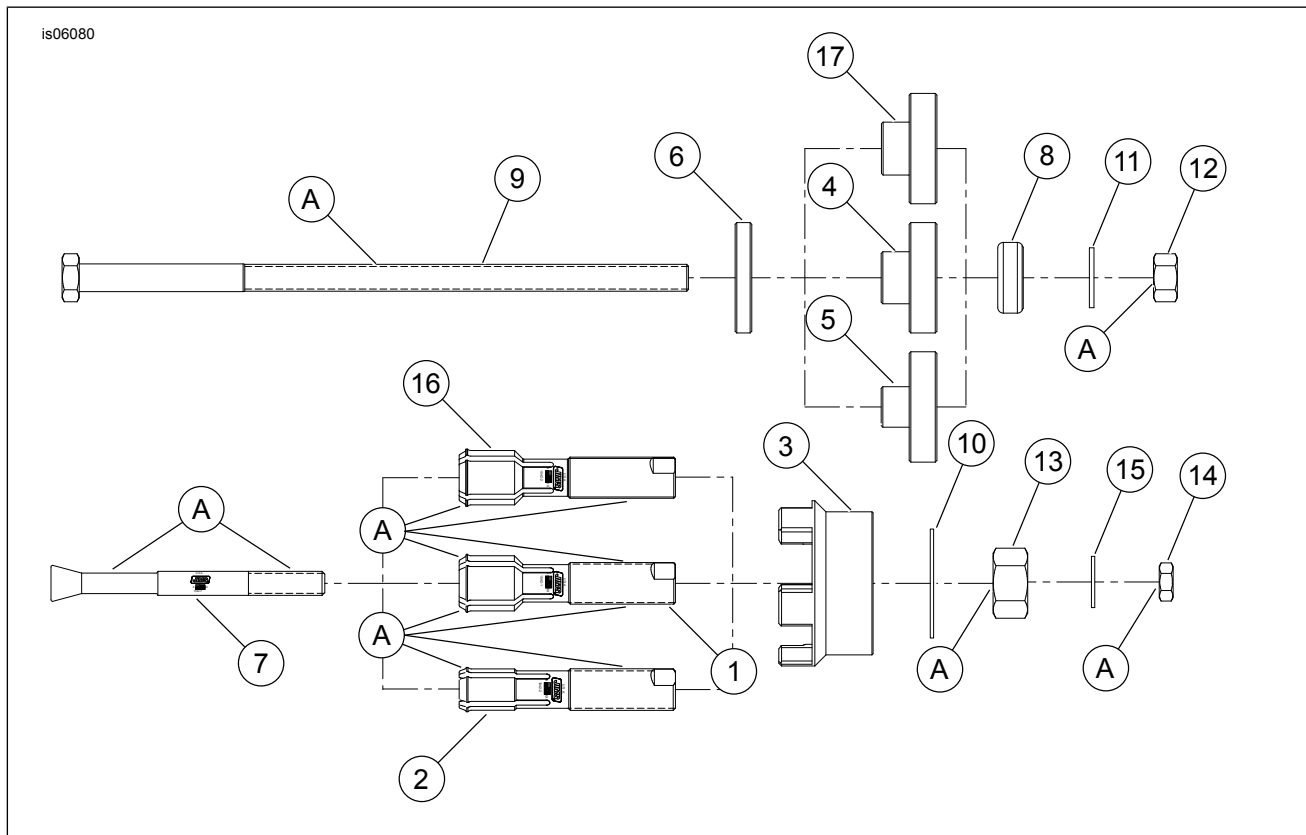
Service Parts: Wheel Bearing Removal and Installation Tool
